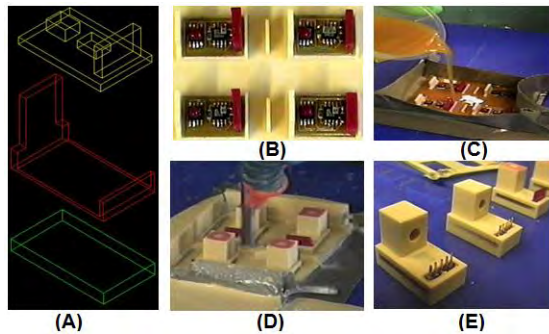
An example of SDM manufacturing process: Designing (A), Embedding process after machining the mold (B), Depositing the part material (C), Machining (D), and Releasing from mold (E) [10].
